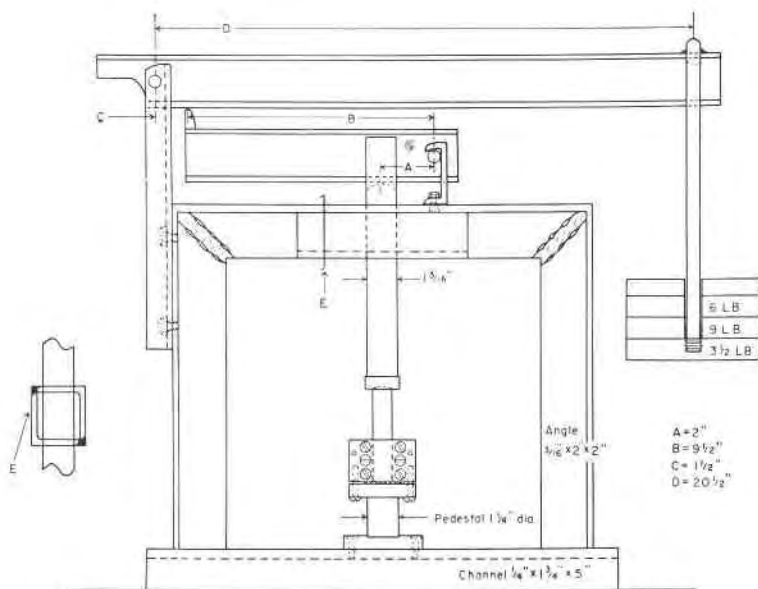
Diagram showing in elevation the assembly of press and mold.
